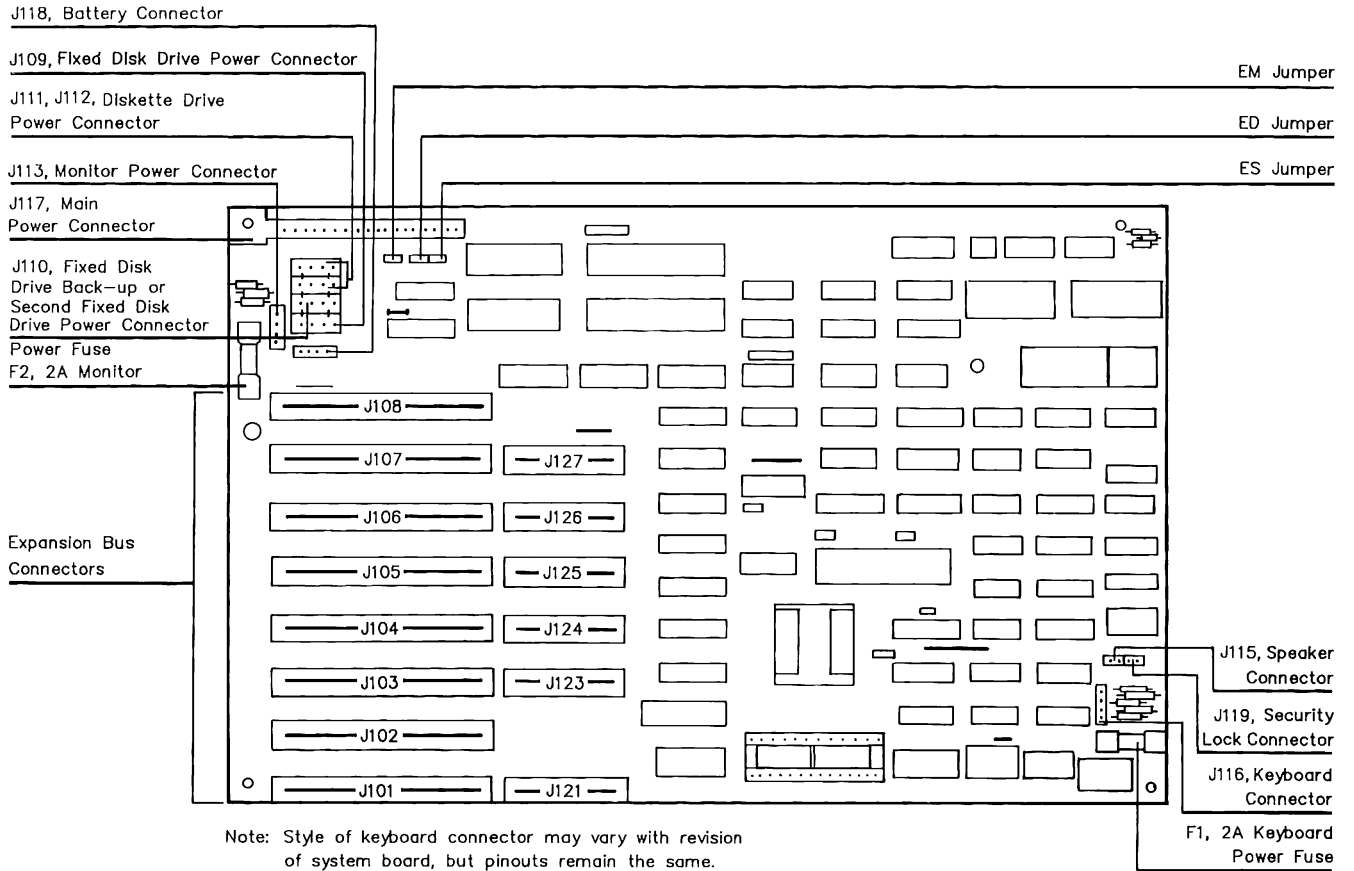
COMPAQ DESKPRO 286 Version 1 System Board Connectors and Jumpers
